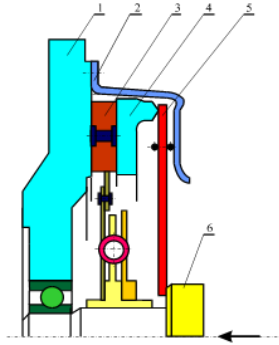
Clutch parts: 1. Flywheel, 2. Clutch cover, 3. Disk, 4. Pressure plate, 5. Diaphragm spring, 6. Release bearing
